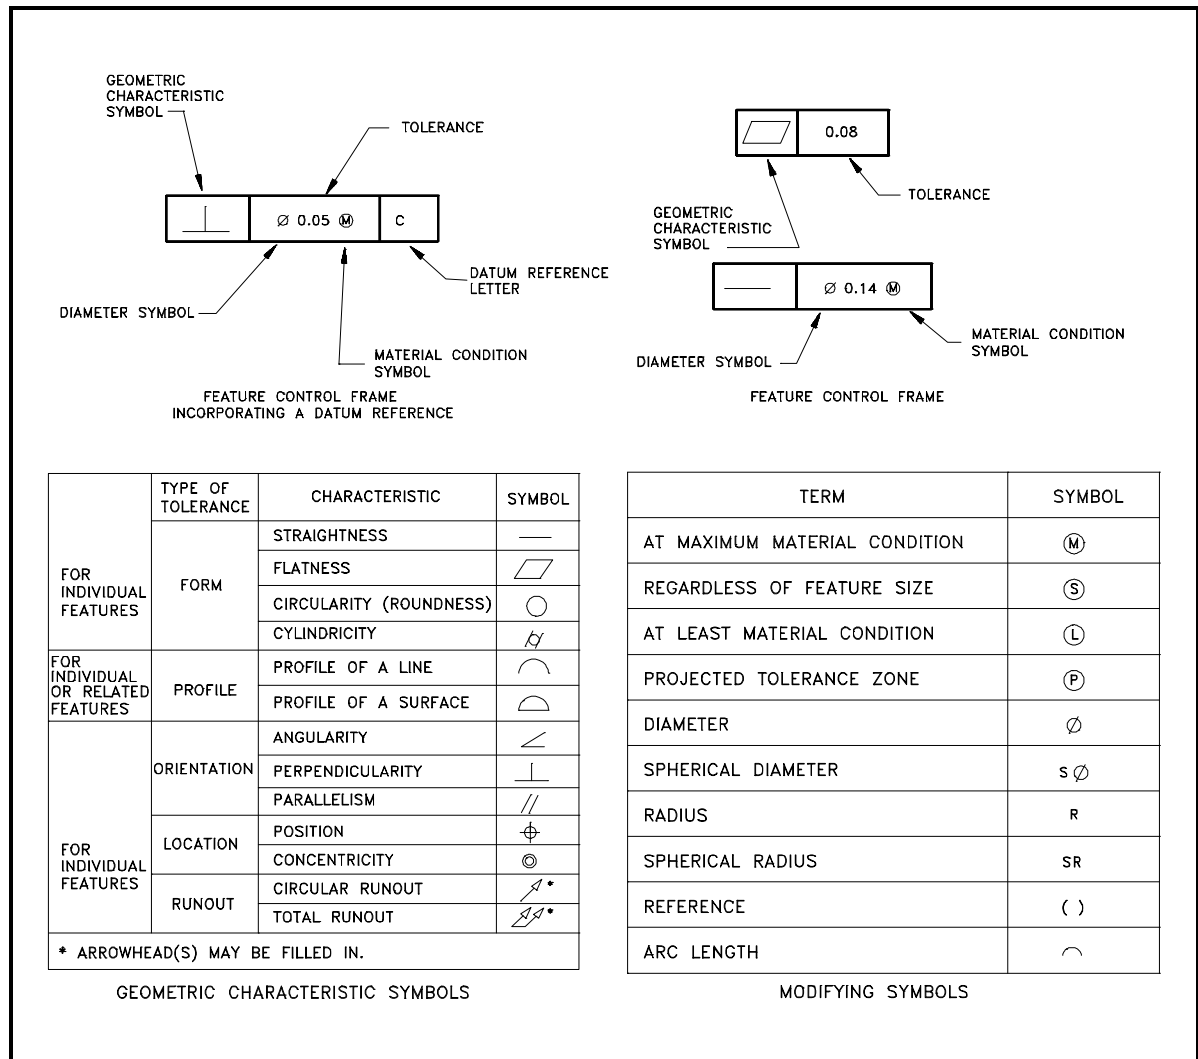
Symbology Used in Tolerancing Drawings
